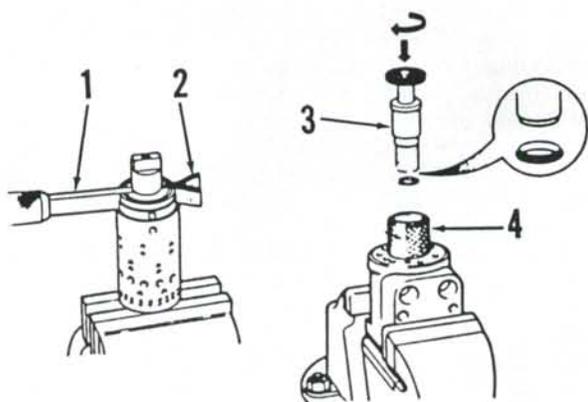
View showing method of installing centering springs and shaft seal rings using Case special tools.
